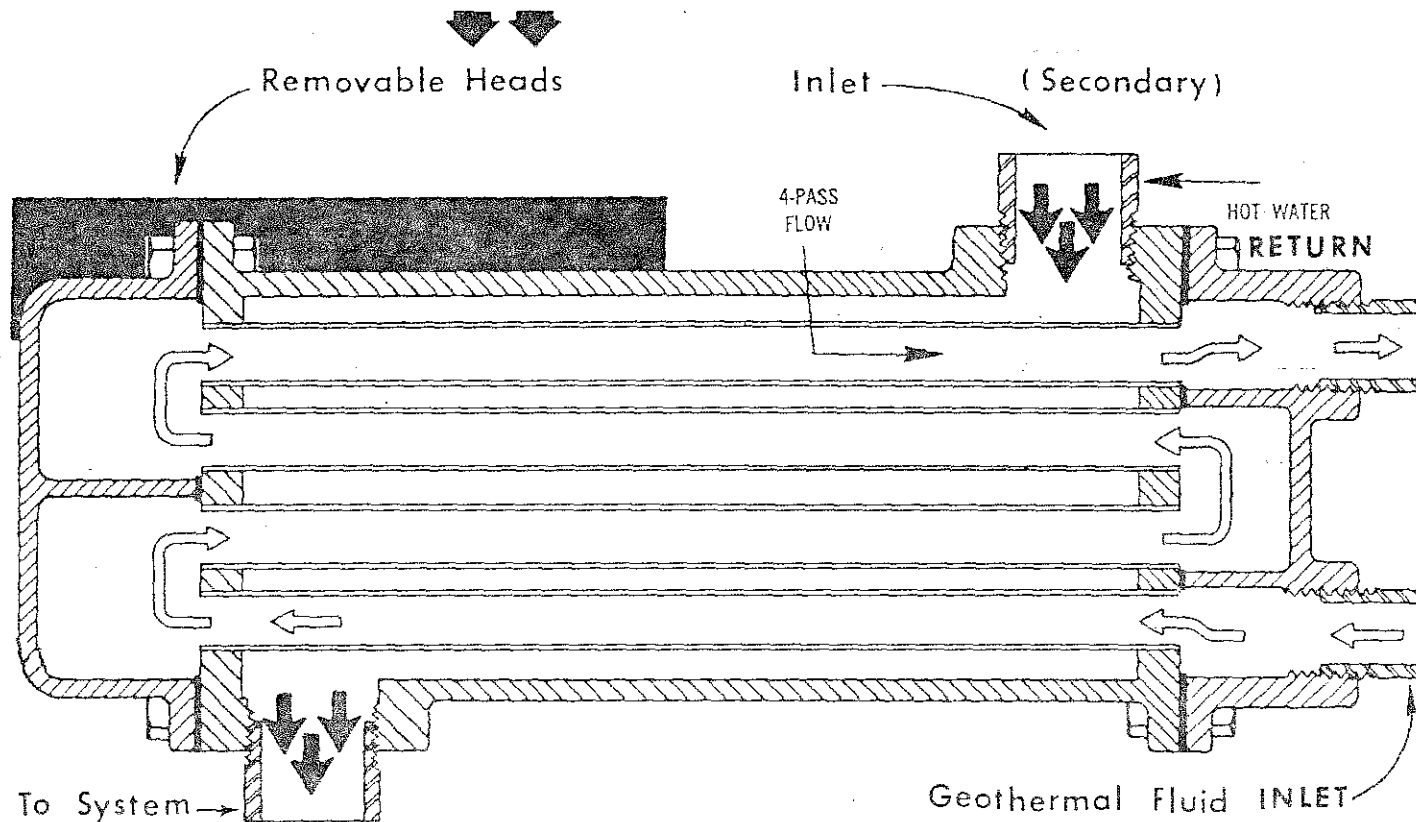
A typical shell and tube heat exchanger with straight tubes and removable heads applicable for a geothermal heating system.
